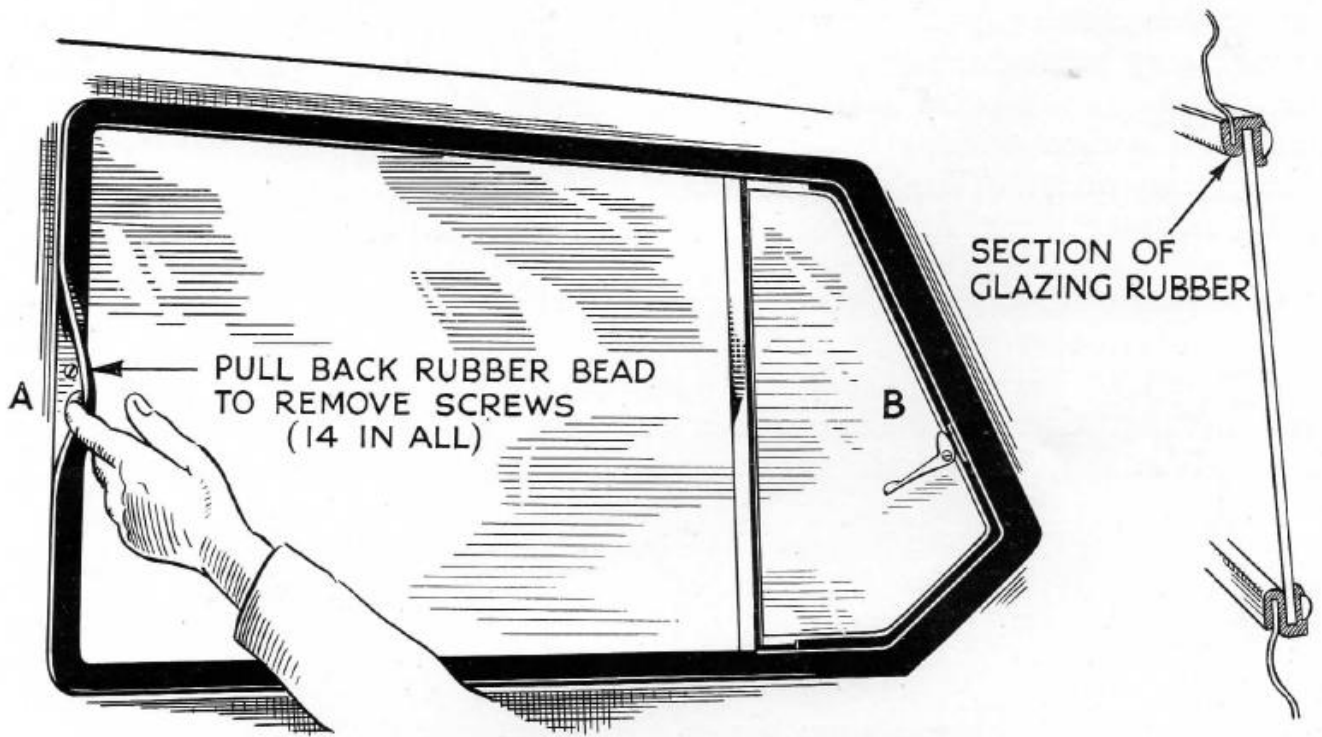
Showing the rear quarter light rubber beading turned back to expose one of the fourteen Barker Kalon drive screws.
